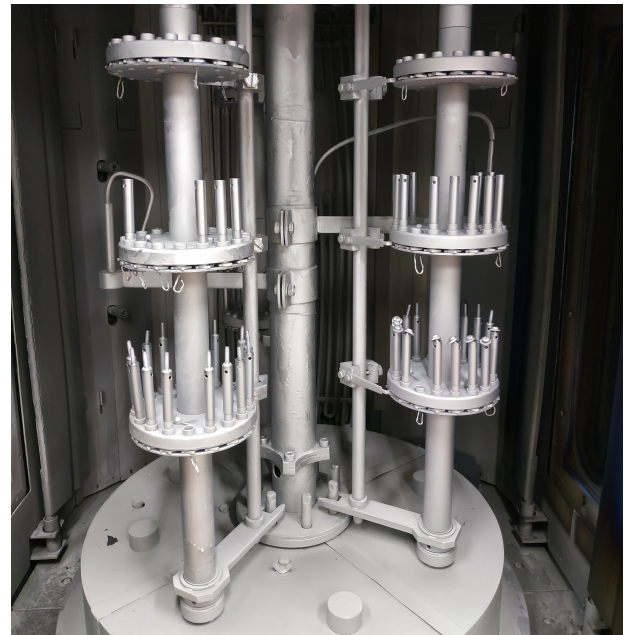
The chamber of the Hauzer Flexicoat 850 coating machine.
